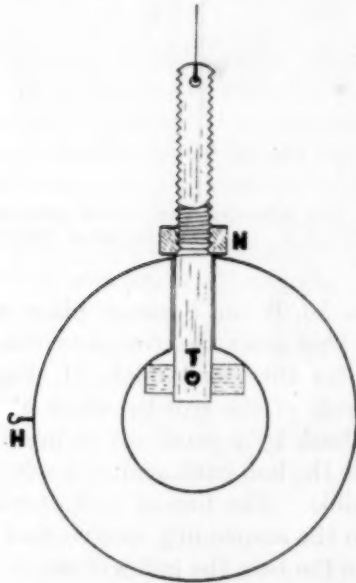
THE PENDULUM BOB IS A HOLLOW IRON SPHERE WHICH IS ATTACHED TO THE SUSPENDING WIRE BY A TOGGLE BOLT.
